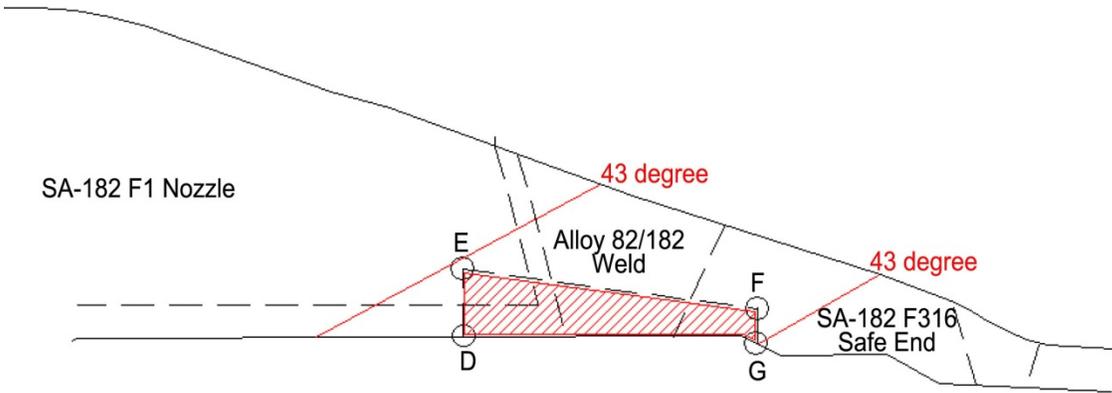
Charging Inlet Nozzle Weld Axial Scan CRV Coverage Assessment
